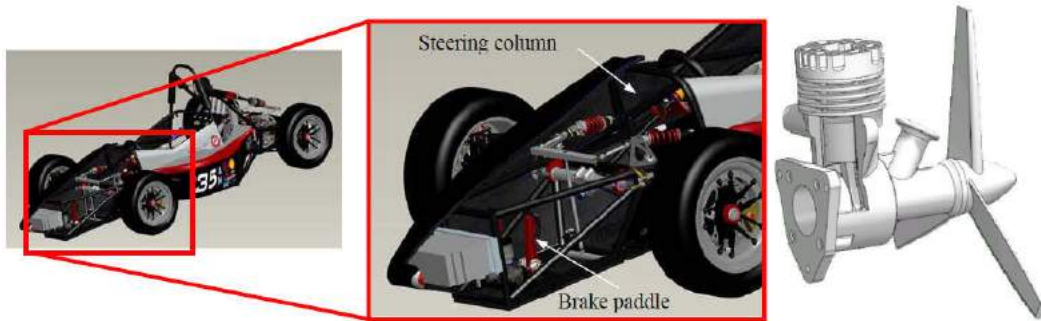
Portion of the part or assembly removed to reveal internal structure: (a) Front cover partially removed on race car, and (b) Engine case partially removed.
